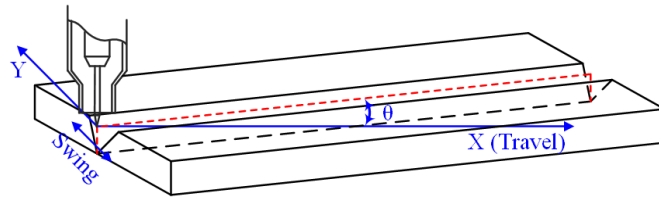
Welding Torch Travel Direction Deviates the Weld Seam with Degree θ .
